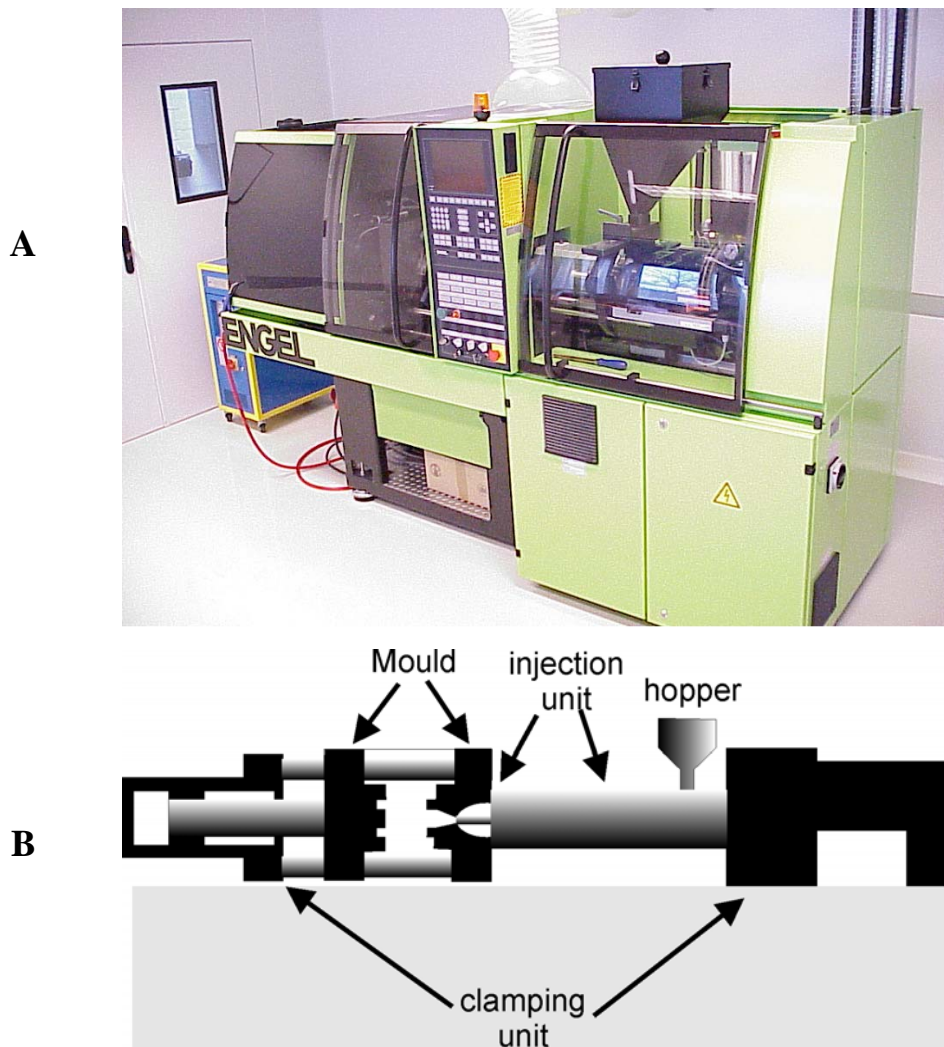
(A) Engel 25 tonnes injection moulding machine utilized in part of the presented experiments. (B) Schematic view of an injection moulding machine illustrating the main parts. (Adapted from⁸⁵).
